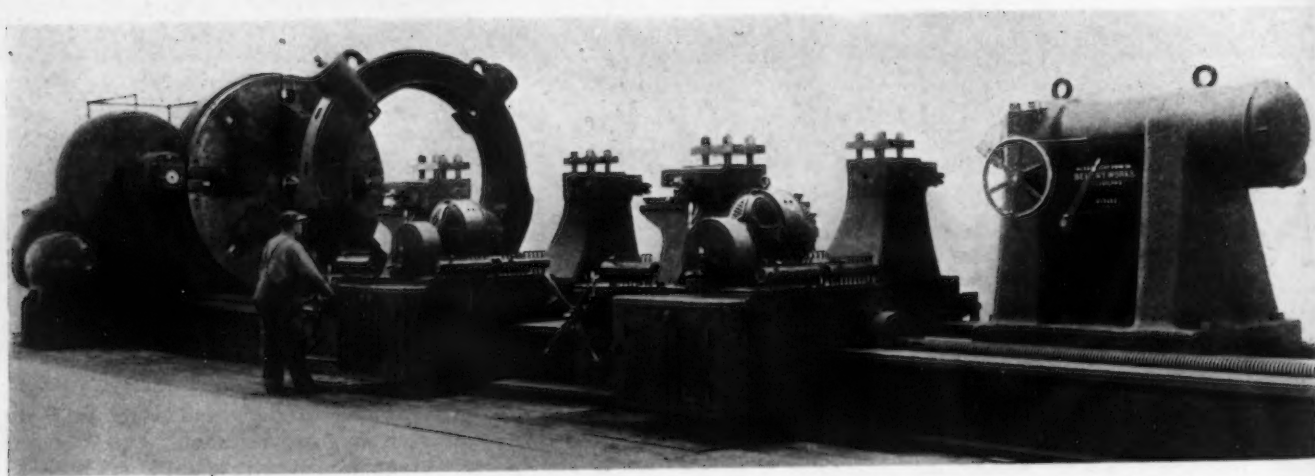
Hoop and jacket forgings are rough turned on 120-in. extra-heavy turning lathe. ▲ ▲ ▲
